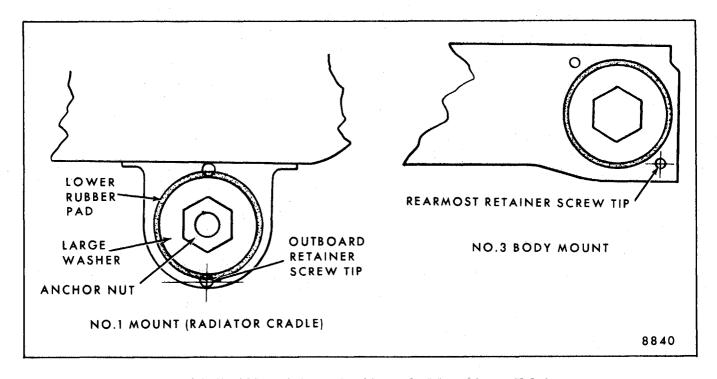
No. 1 Mount (Radiator Cradle) and No. 3 Body Mount - K Style
